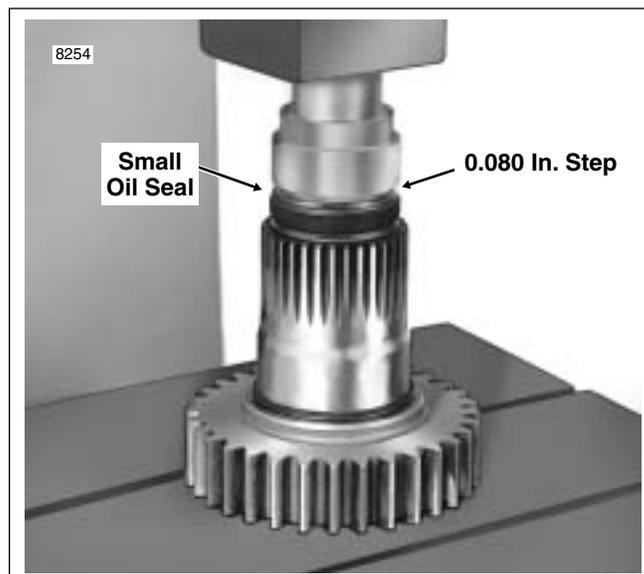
Press Small Oil Seal into Main Drive Gear
